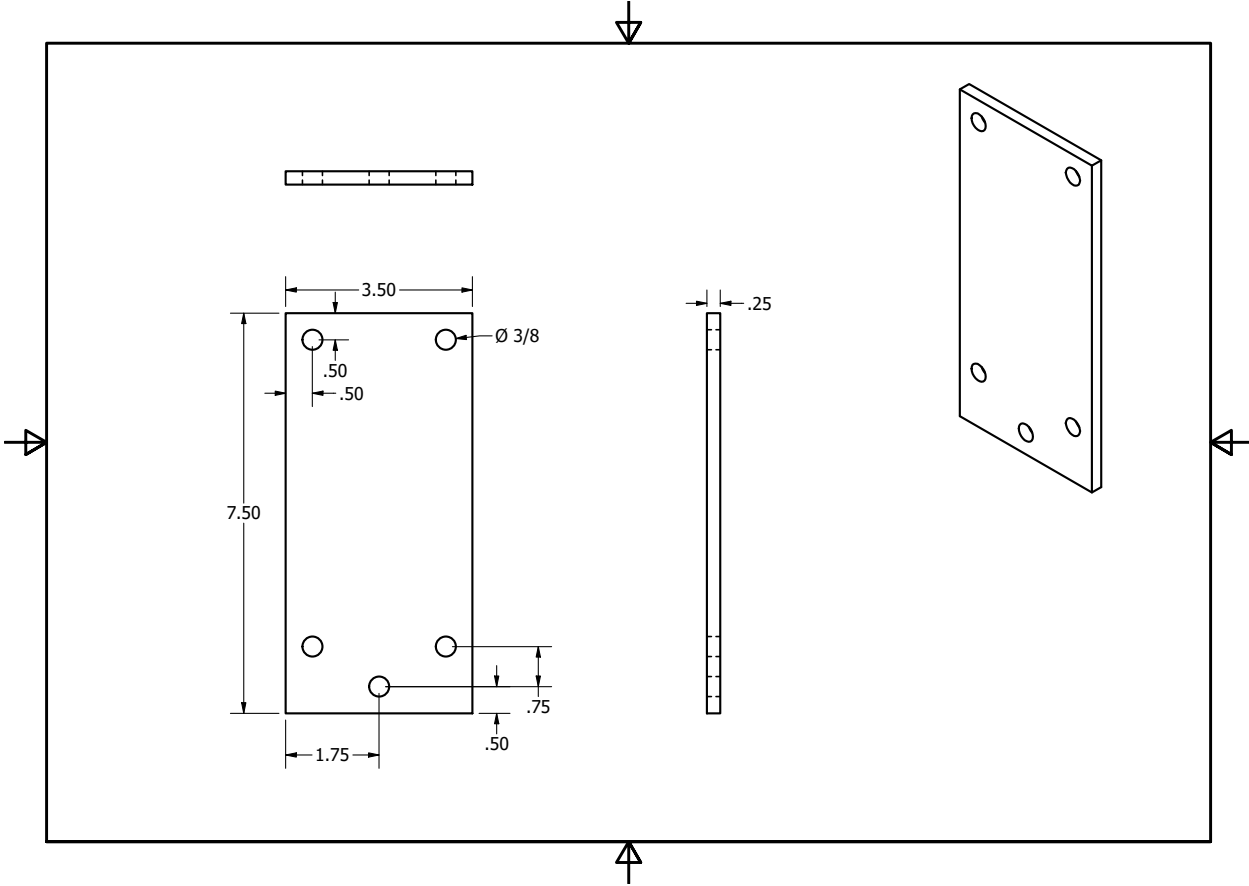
Dimensioned Drawing of Shear Loading Plates
